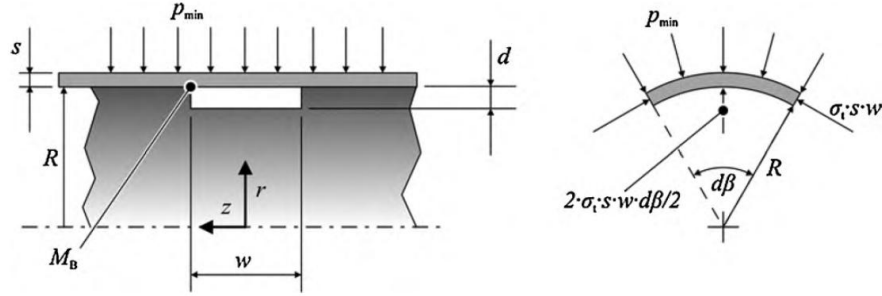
Geometrical model to determine the bending moment at the groove edge [13].
